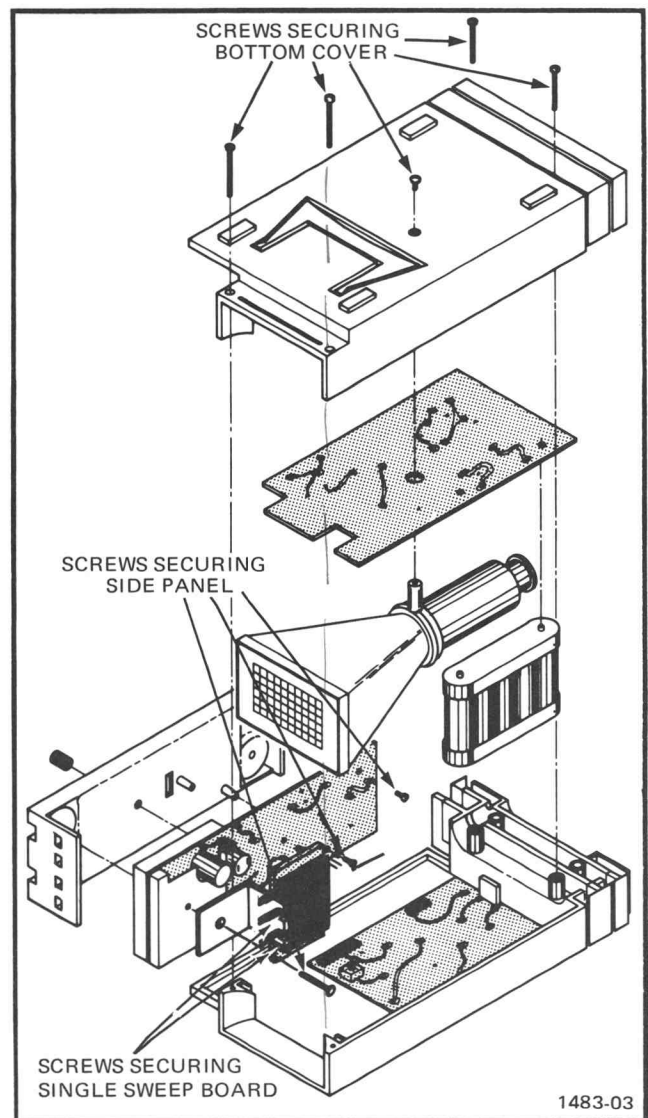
Location of screws for disassembly. (Instrument shown upside down.)
